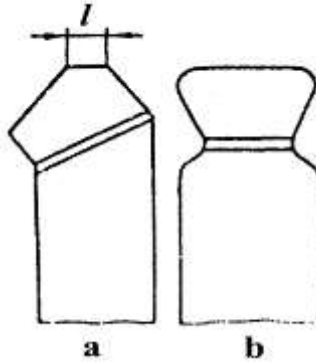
Cutting tools: a – with additional cutting edge; b – finishing
